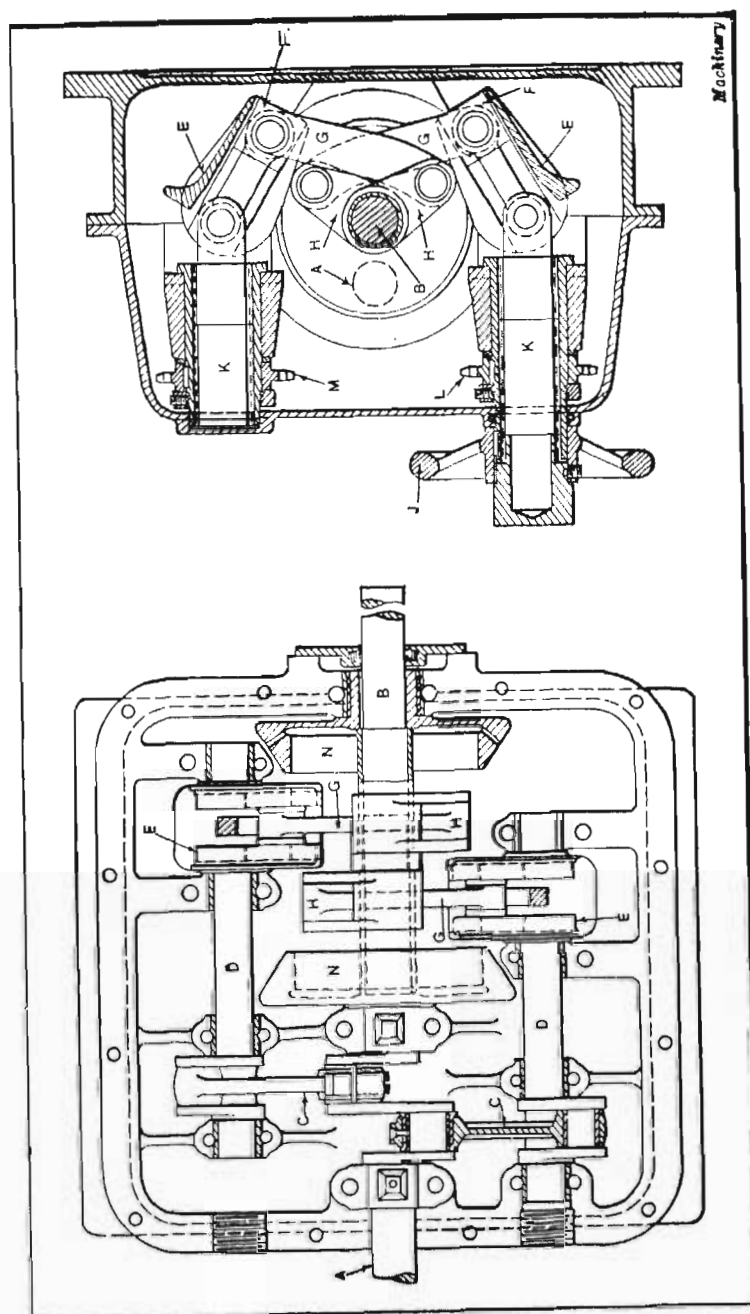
Assembly Drawing Showing the Construction of the Variable-speed Transmission
